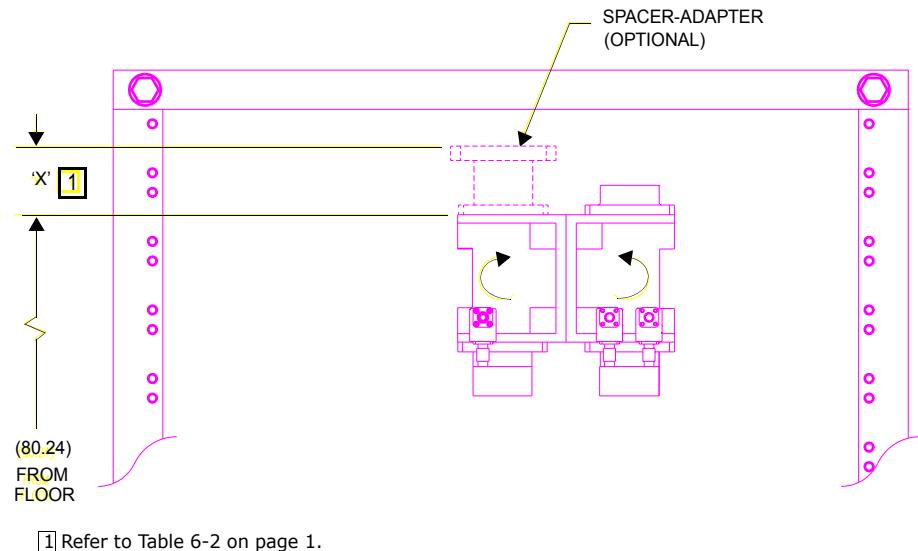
ACU, hot-standby (front view), mechanical drawing
